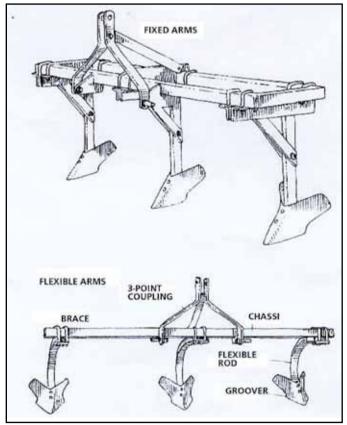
Equipment Used in Dry Farming System Source: Gastão Silveira.
